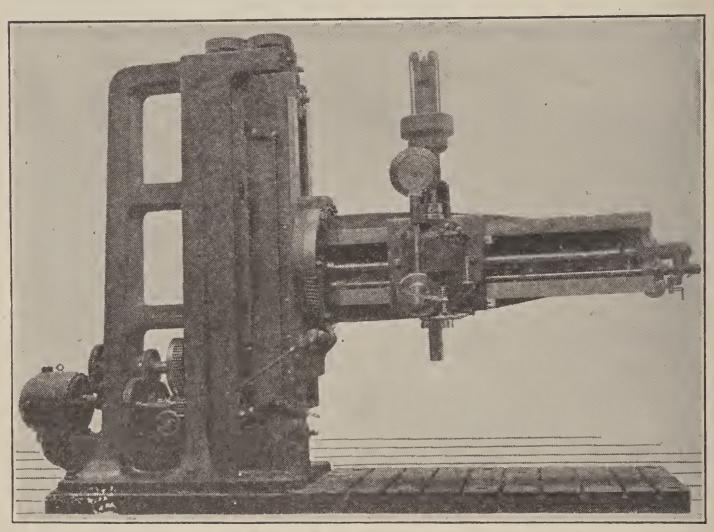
Universal radial boring, drilling, tapping, and screwing machine, Witkowitz Works.
